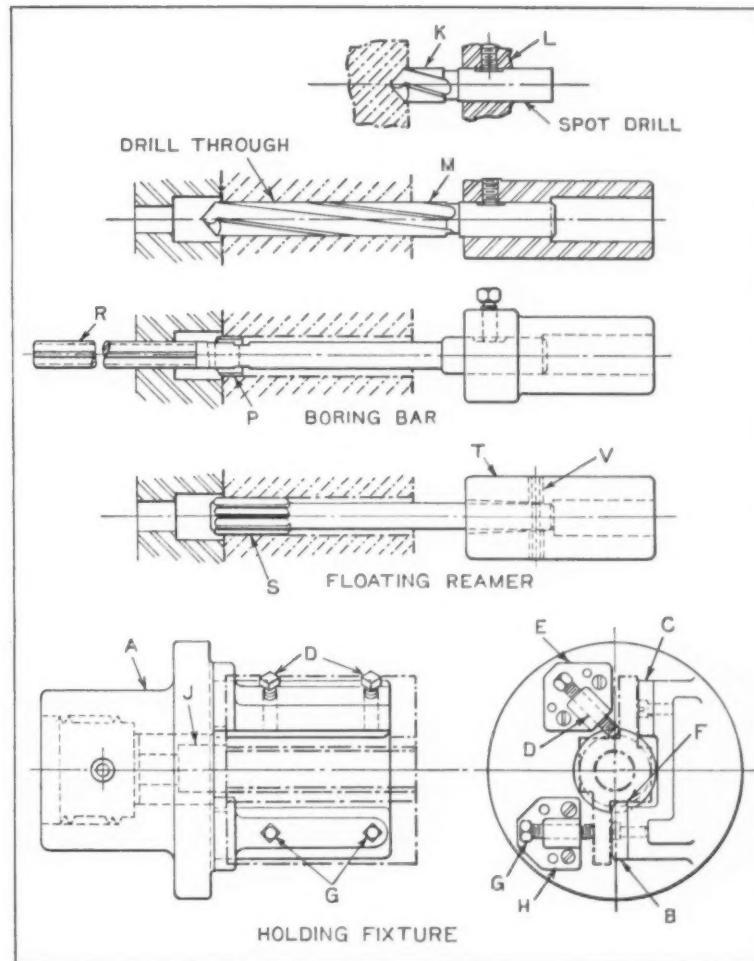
Work-holding Fixture and Tools Used on Turret Lathe for Producing Accurate Center Hole in Part *W*, Fig. 1
